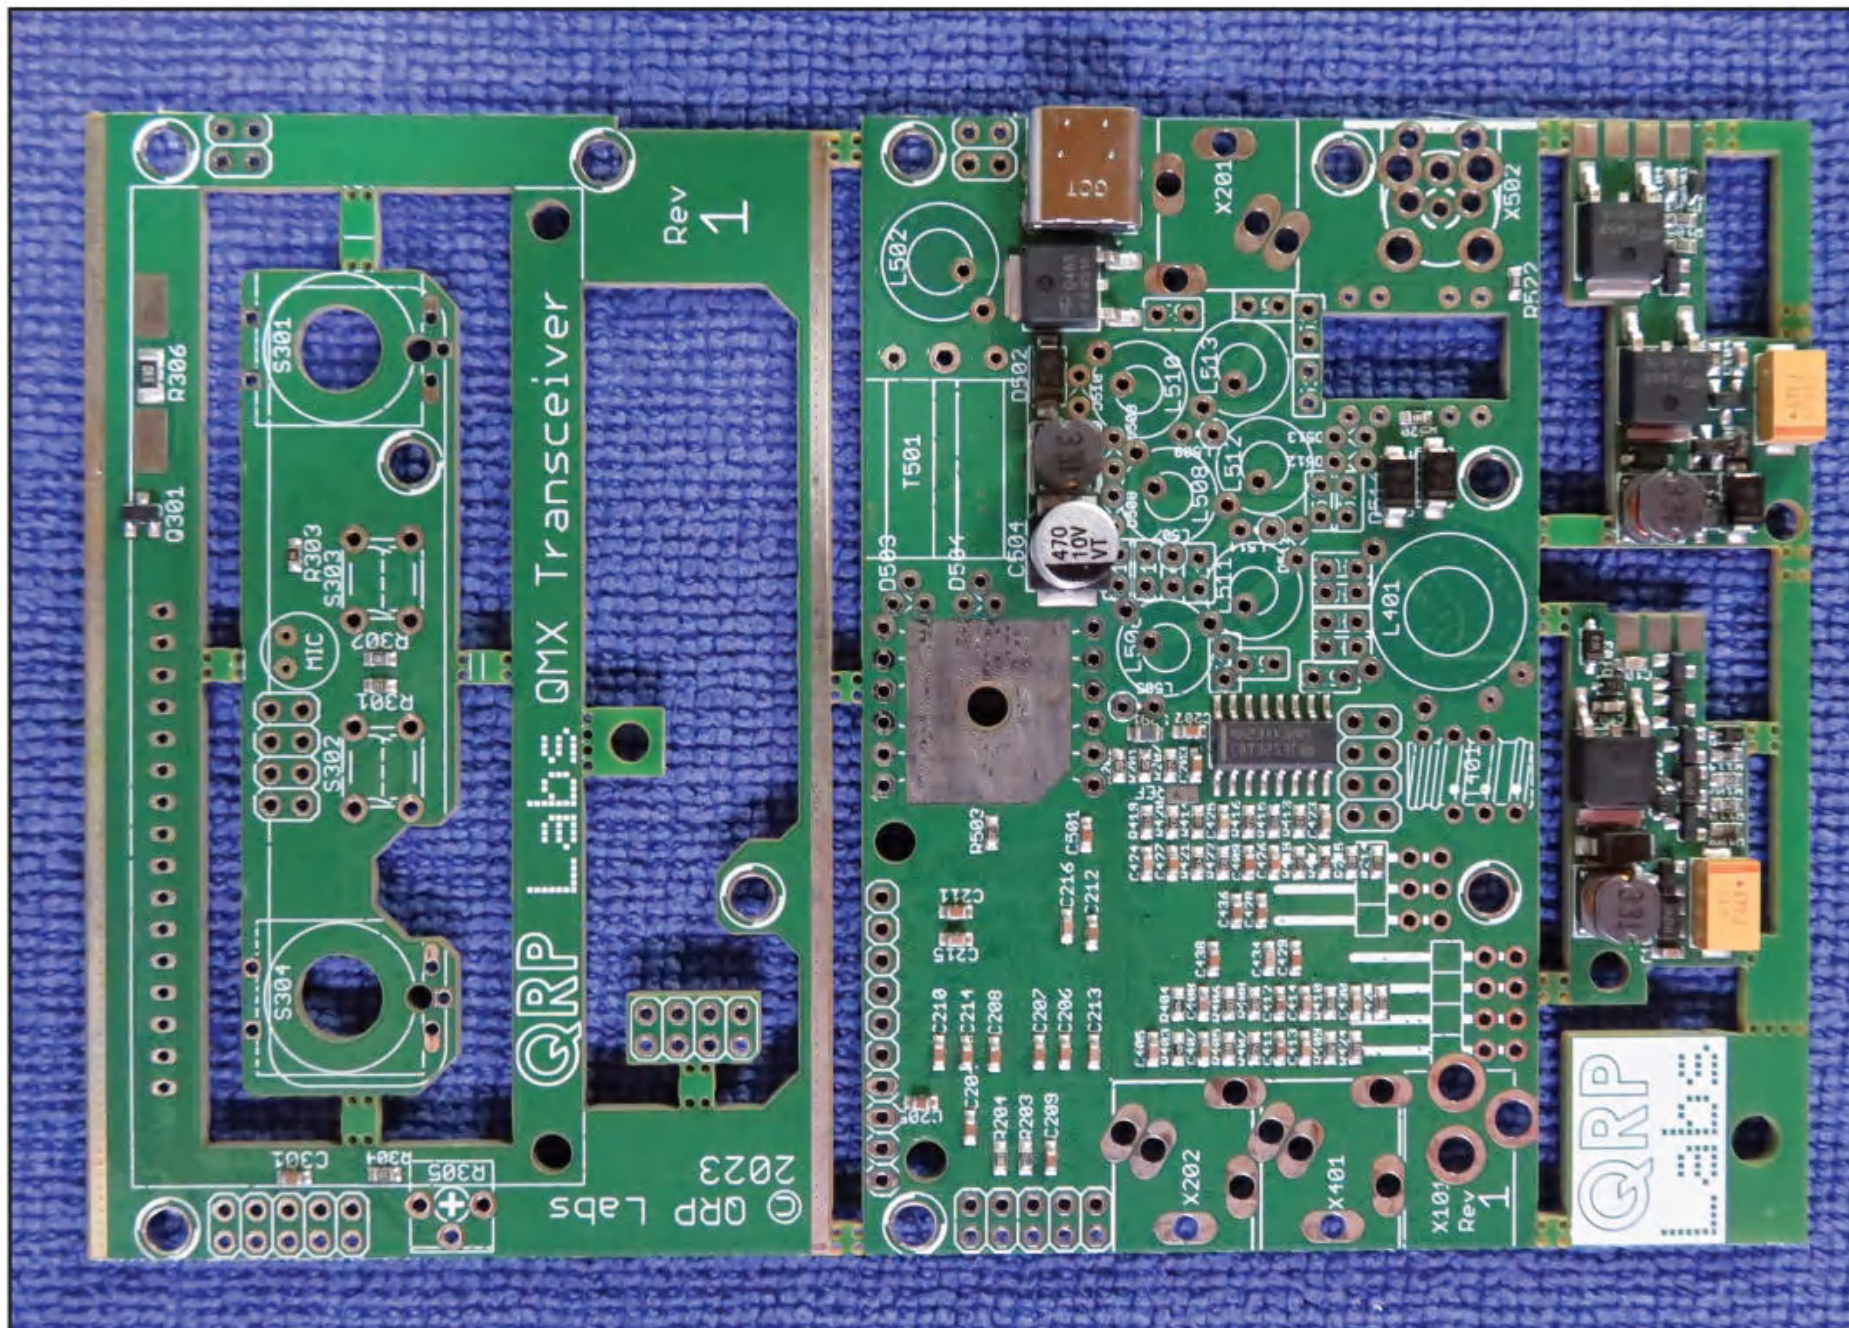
Photo D: The PC board is in multiple segments that must be separated before assembly. The QRP Kits logo segment on the lower right is actually a souvenir key fob tab!
